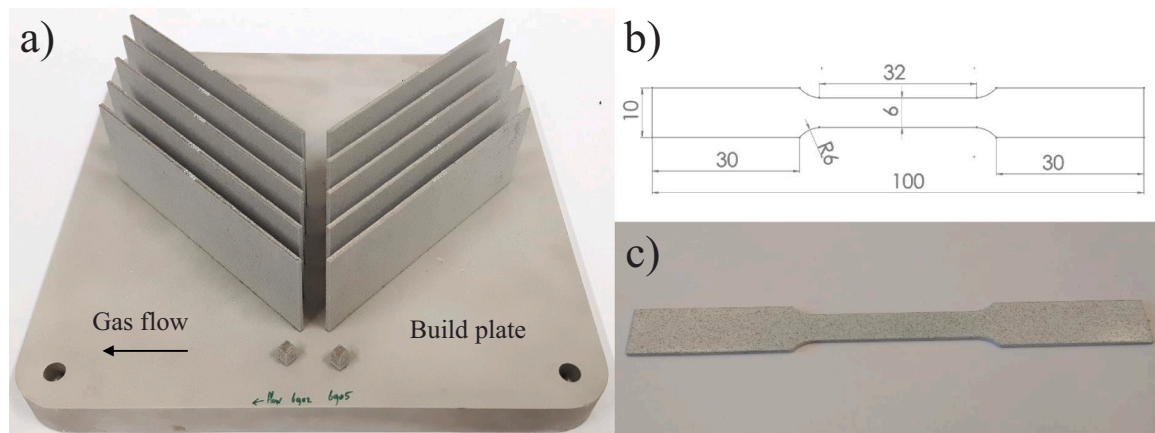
(a) Beams built by LPBF on the build platform ($280 \times 280 \times 360 \text{ mm}^3$), (b) geometry of the tensile test specimens – dimensions are given in millimetres, 1 mm thickness, (c) the machined and painted tensile specimens.
